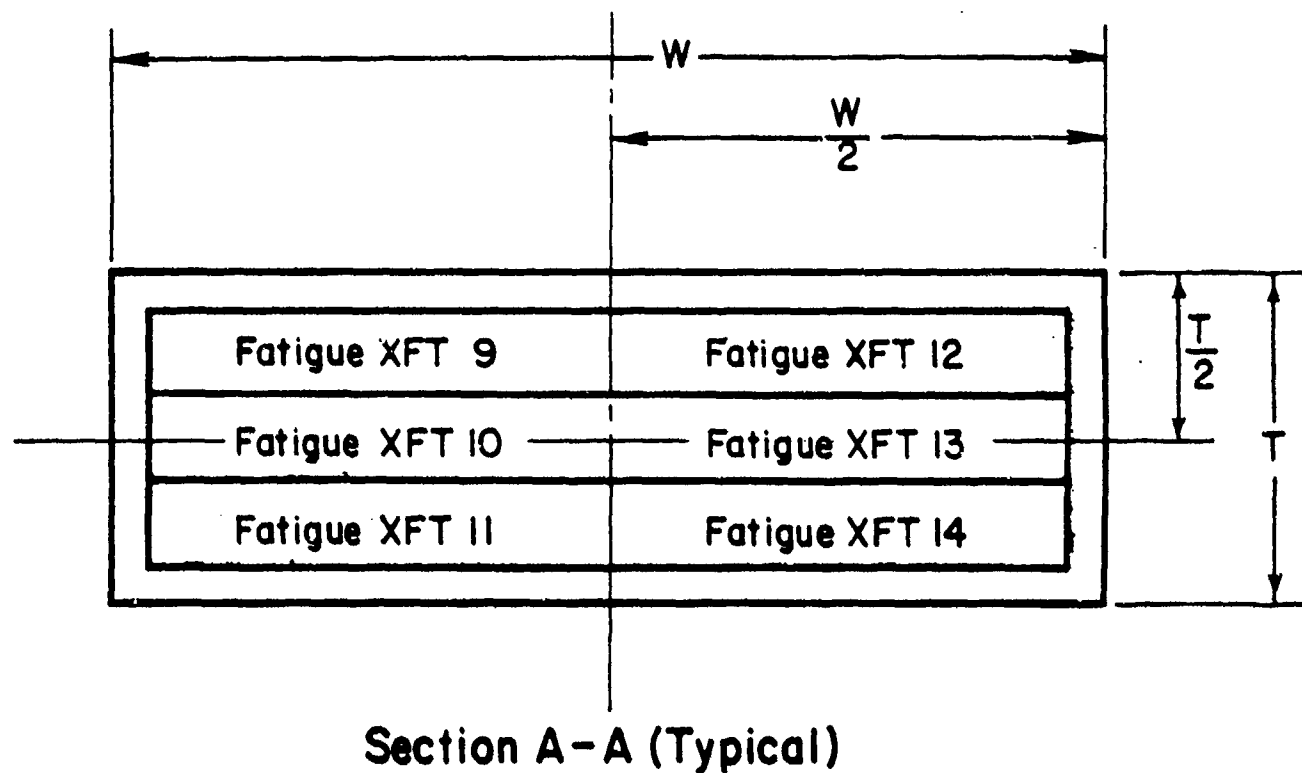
Specimen location for 7149-T73 hand forgings--Section A-A.
